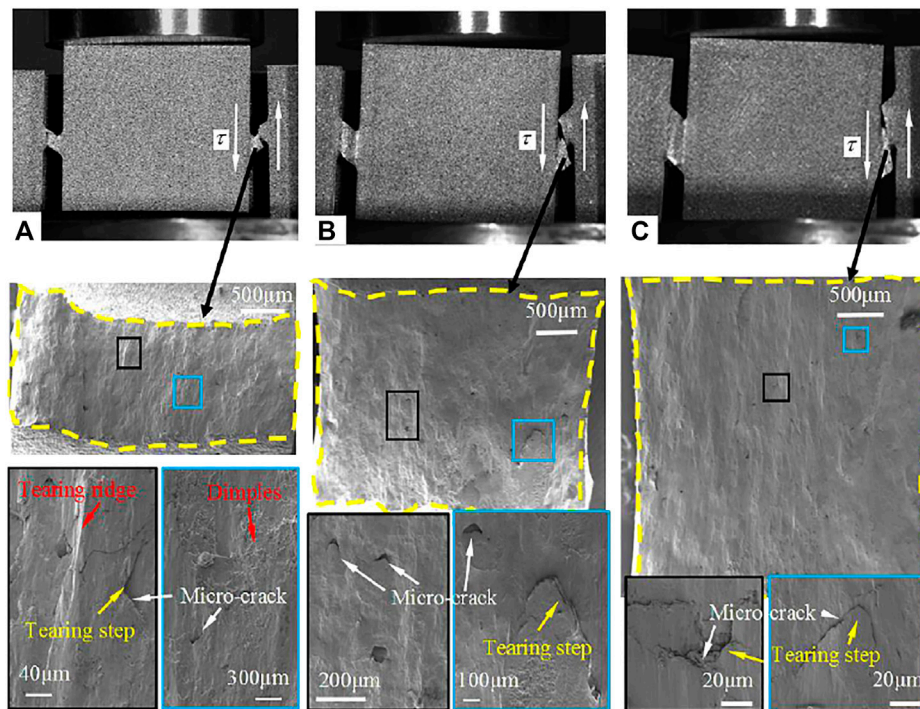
| SEM images of the fracture surface of weld specimens with different welding lengths under quasi-static tests with a shear strain rate of about 0.001 s^{-1} : (A) 2 mm weld specimen, (B) 4 mm weld specimen, and (C) 6 mm weld specimen.
